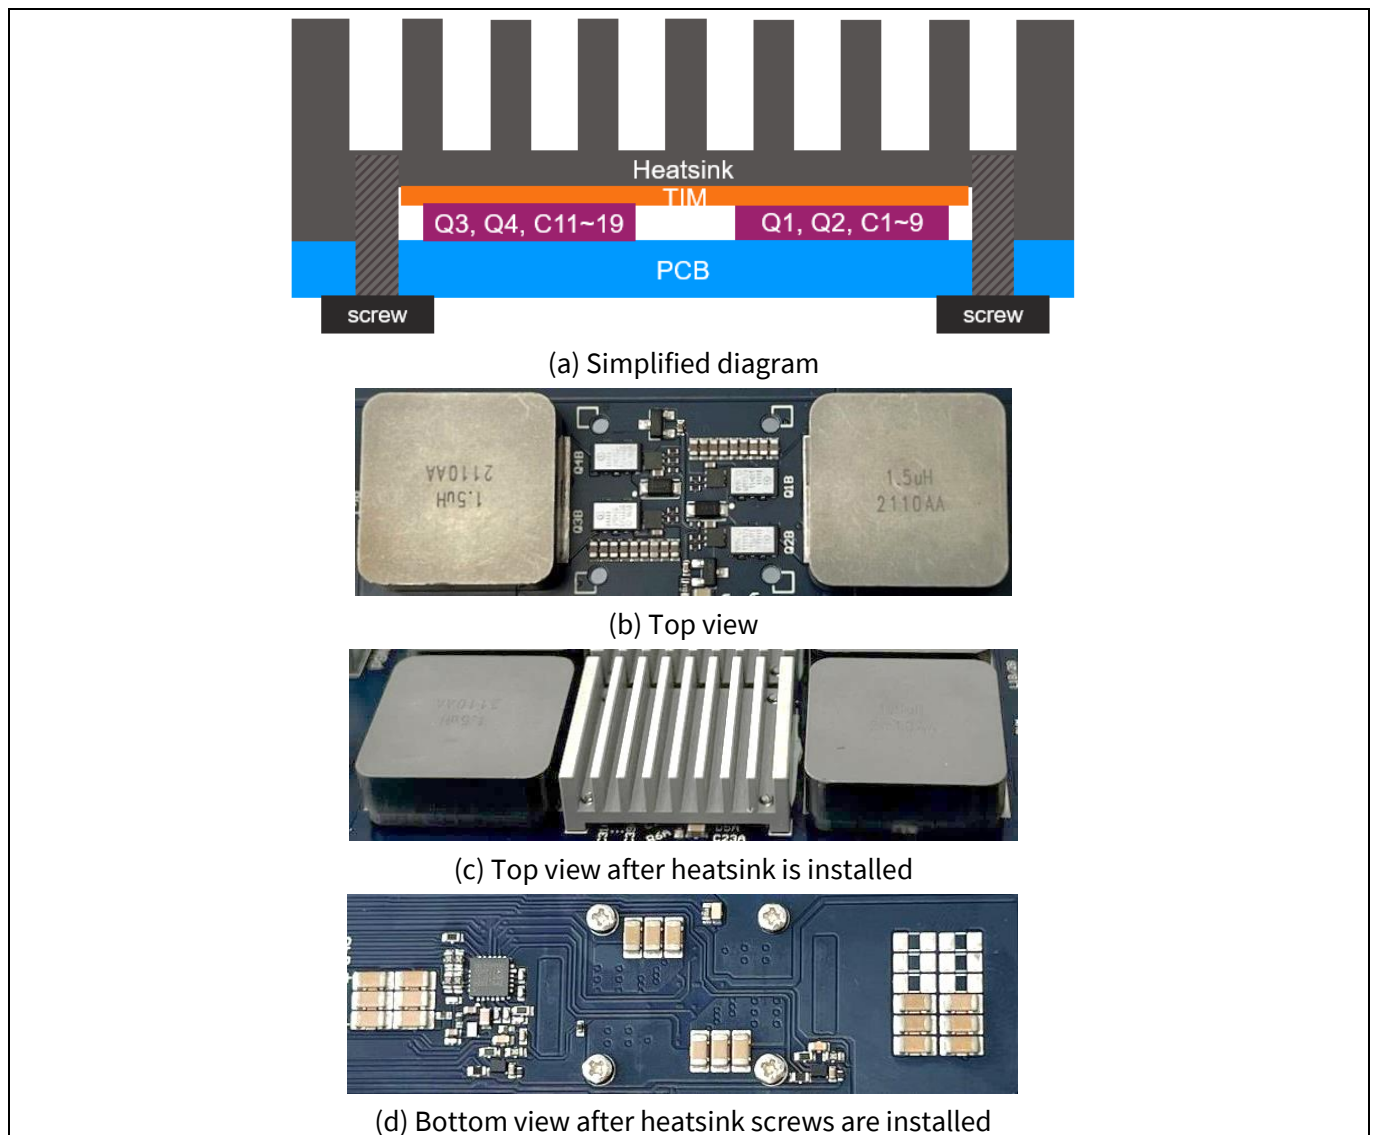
demonstrates the thermal design implemented in an example multi-phase buck converter design [5]. The heatsink is mounted with a fixed gap, rather than a fixed pressure. Fixed-gap assemblies use a shim, projection, or rail on the heatsink to define the distance between the PCB and the underside of the heatsink. The gap between the heatsink and CoolGaN™ power transistor is that distance minus the transistor's seated height (package height + solder paste). In the example shown below, the heatsink stands off from the PCB at a height of 1.2 mm. The seated height of the CoolGaN™ power transistor is approximately 1.0 mm<sub>max</sub>. This leaves ~0.2 mm to be filled by a compressed thermal interface material (TIM). This design uses an ultra-soft pad
